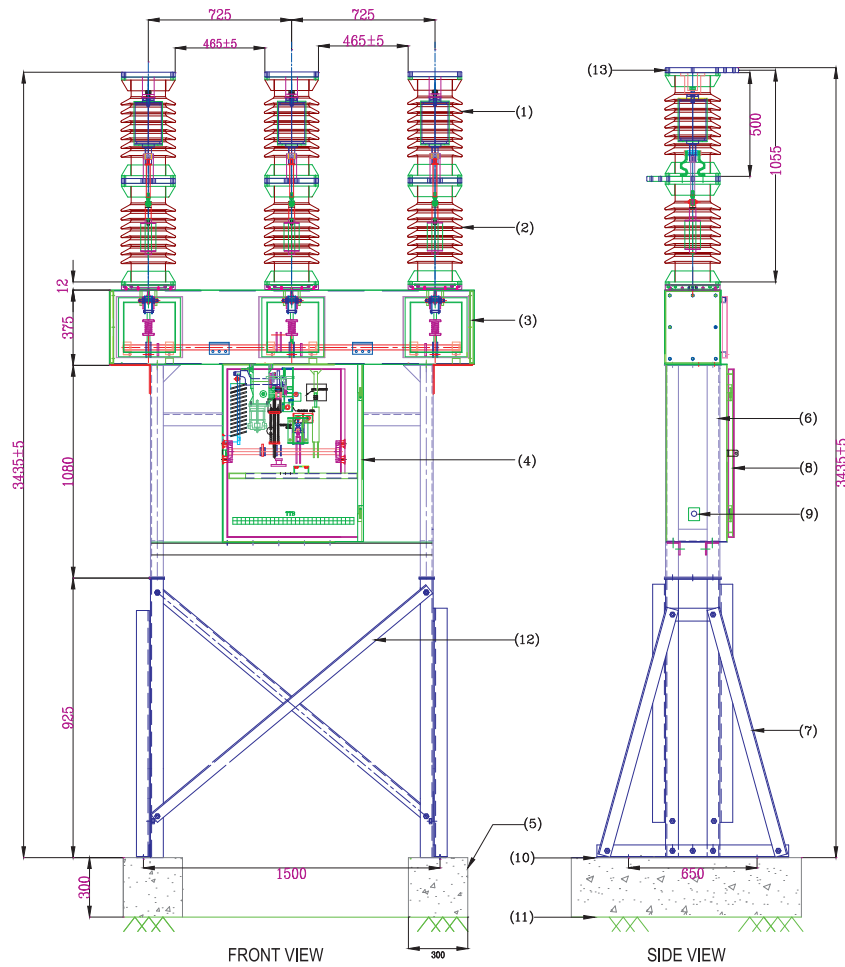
EOFVp-36 outdoor vacuum circuit breaker basic dimensions
